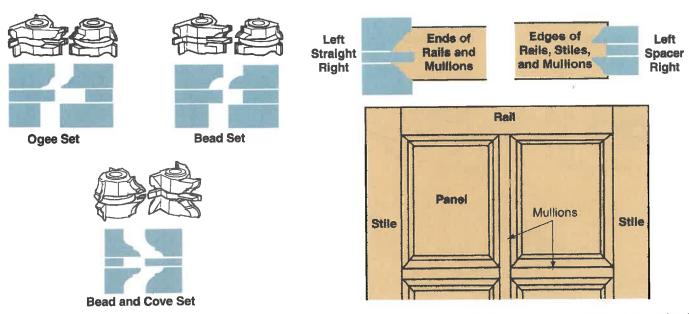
Profile one or two sides of a panel frame with one-pass matched shaper cutters. (Delta International Machinery Corp.)
